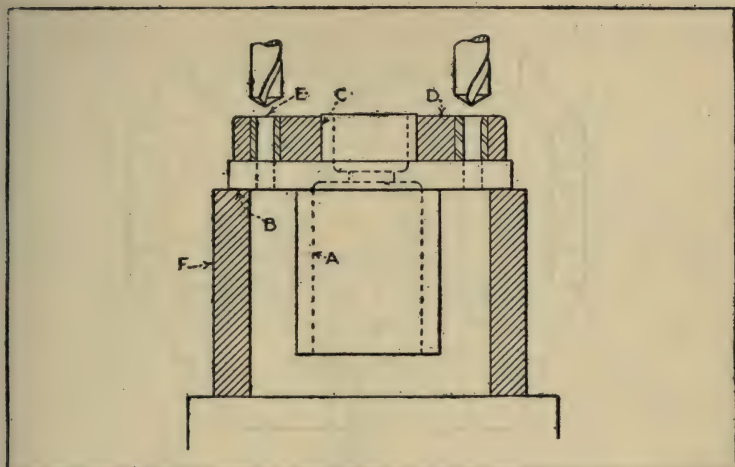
PLATE JIG WITH SUPPLEMENTARY PLATE
